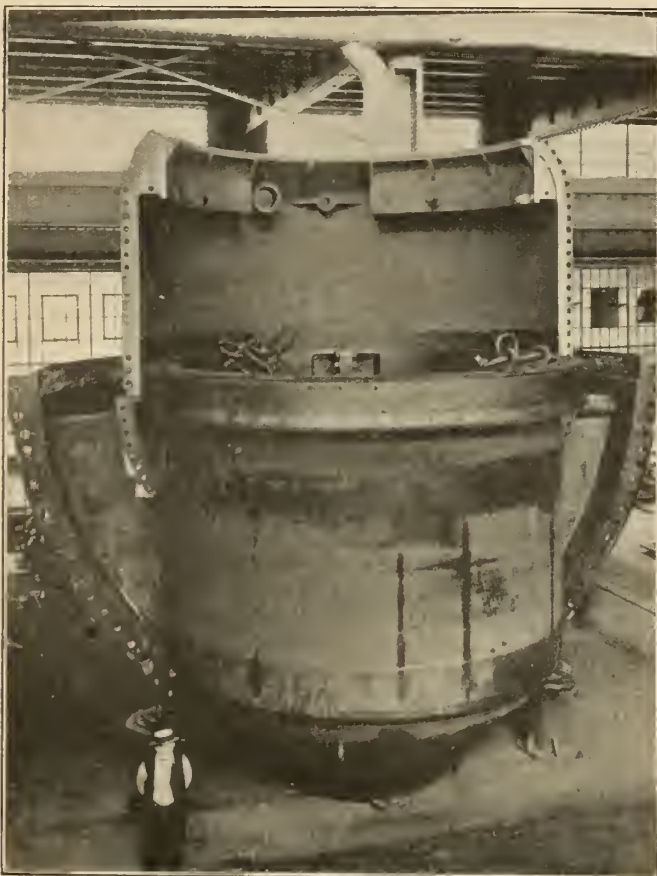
Shop View of 20-foot Johnson Valve.
